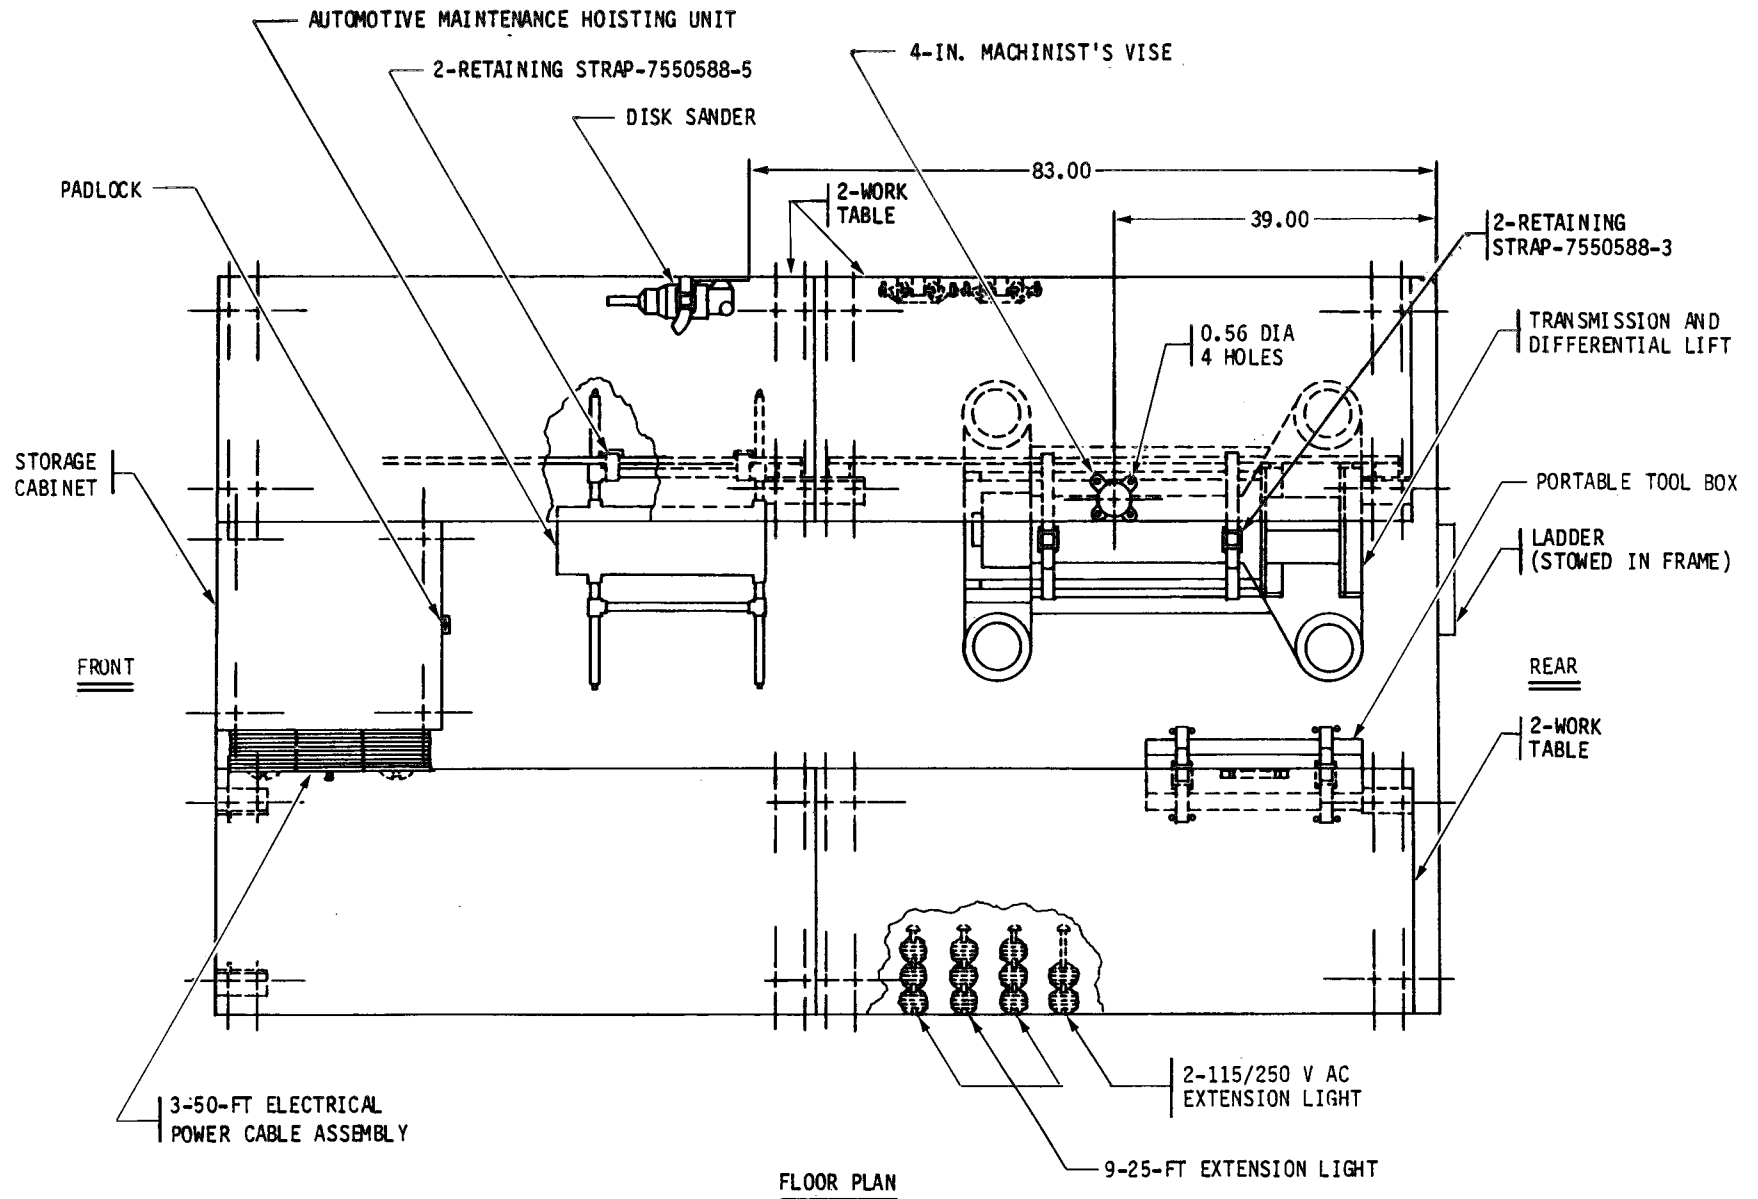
Components to be mounted, floor plan, unit 2, M35A2.
